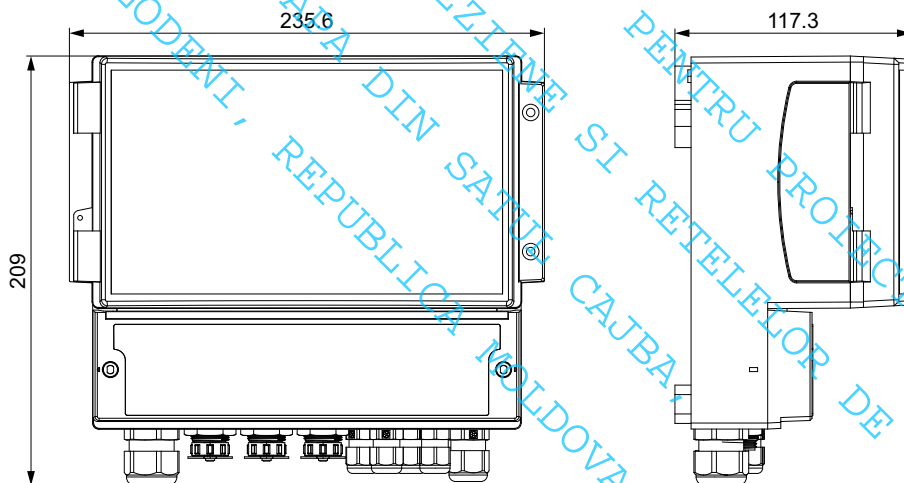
Dimensions of CU 382 control unit, front and side view (in mm)
